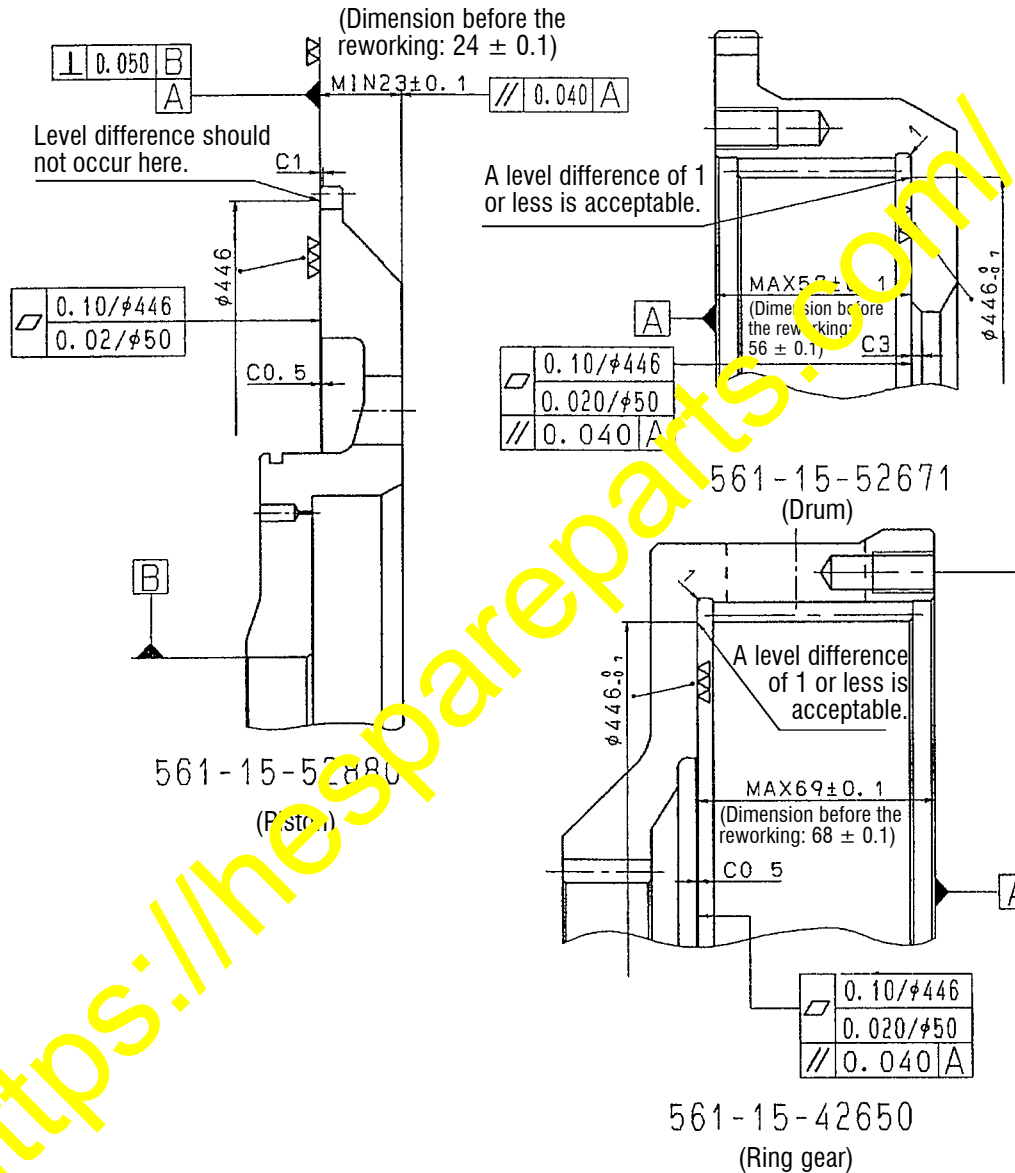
Detailed reworking drawing for the ring gear, piston and drum
